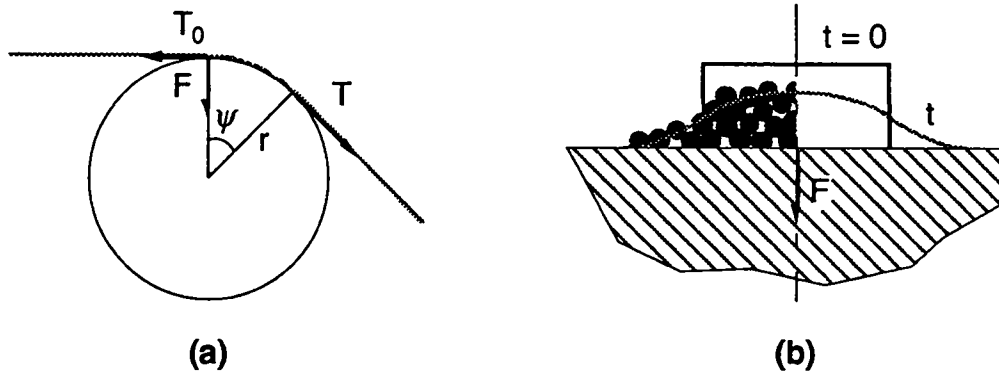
Mechanical tow spreading: (a) force balance; and (b) cross-sectional view.
